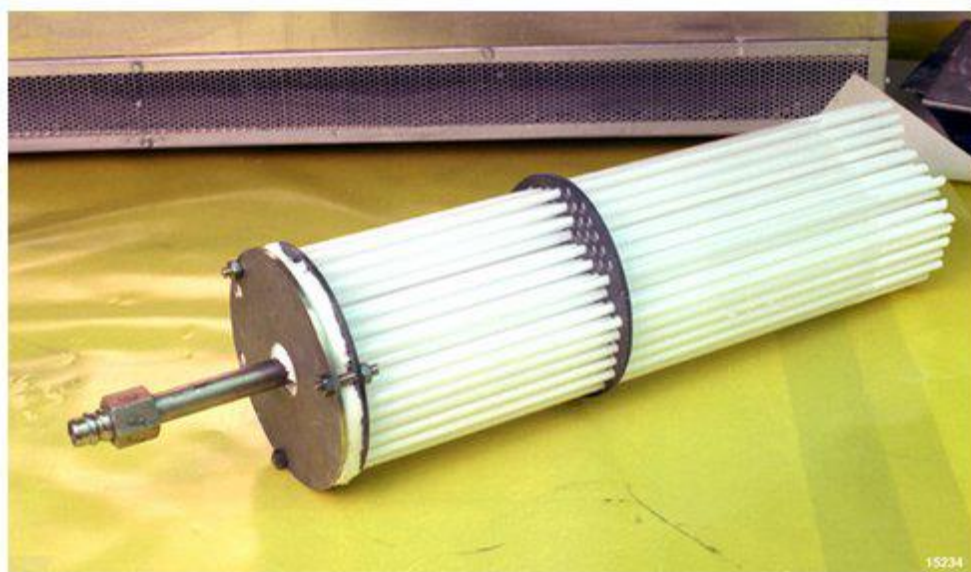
Representative Casting Furnace Palette Ready for Loading into the Casting Furnace
